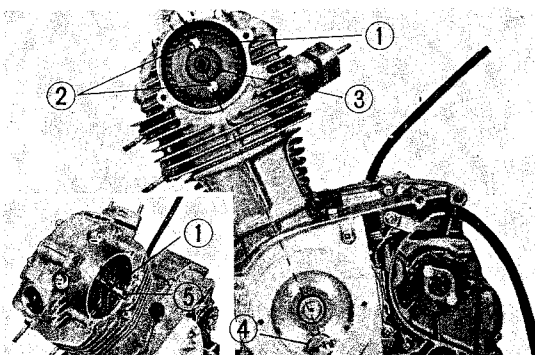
① Cam chain ② 6mm bolts ③ Cam sprocket
